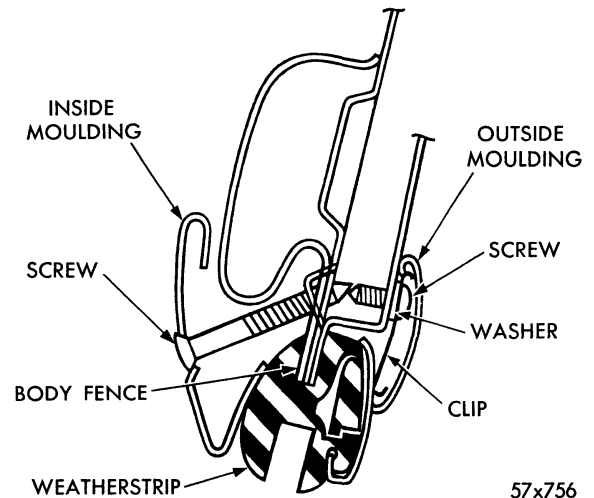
Lower Rear Window Weatherstrip and Moulding
